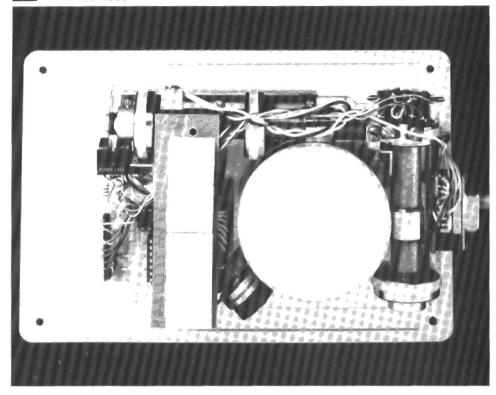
Top view of the completed ball assembly. Note the auxiliary bearing in the lower left corner of the ball assembly.
